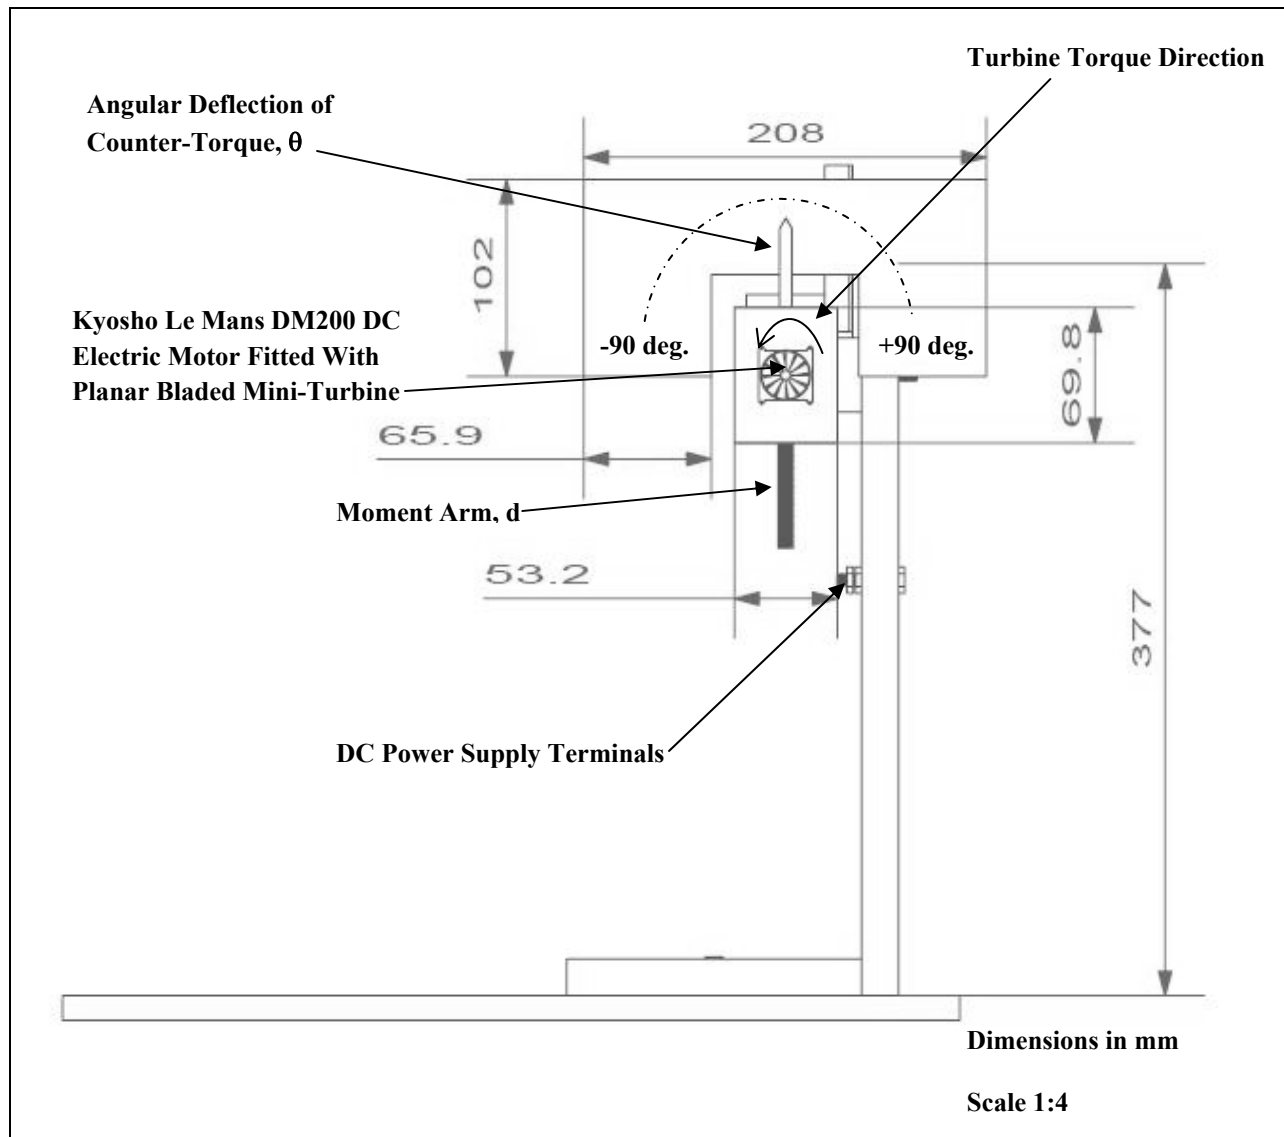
Labeled Diagram to Show the Angular Deflection Dial and Torque Measurement Assembly.
